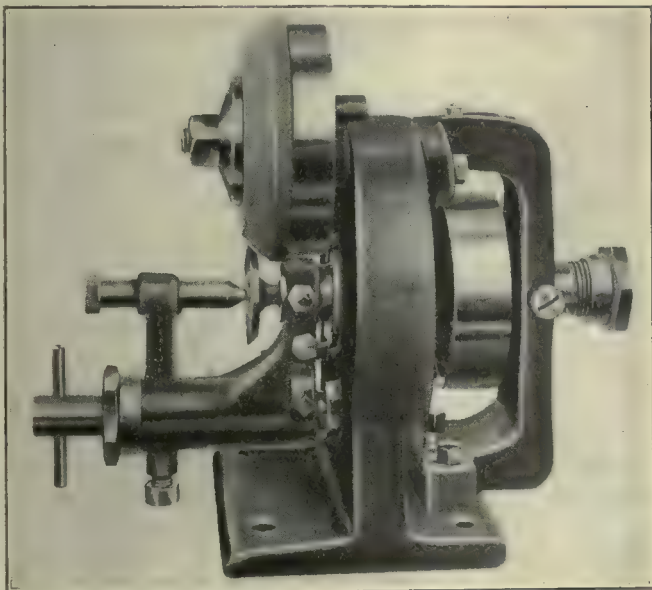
THE MACHINE WITH A VALVE IN PLACE
